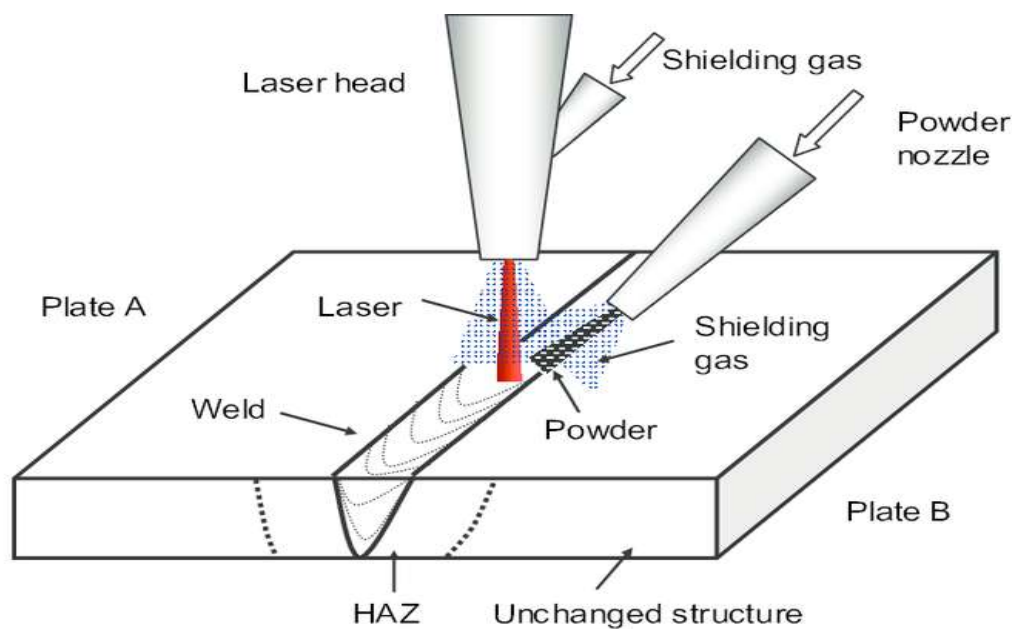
schematic of laser beam welding process (Pic courtesy researchgate.net)
